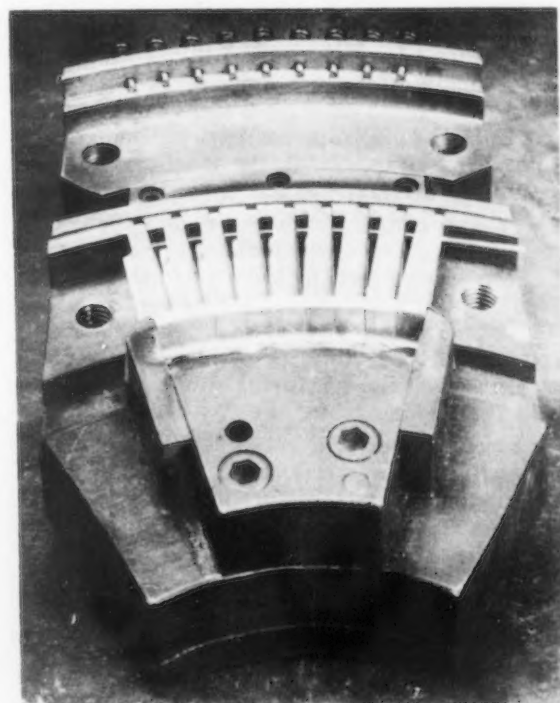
The initial step in assembling the buckets is to make up six segments of nine buckets each. This fixture holds the buckets in place for welding. The cover in the background is clamped on and the bucket bases are welded together by the atomic hydrogen process.
